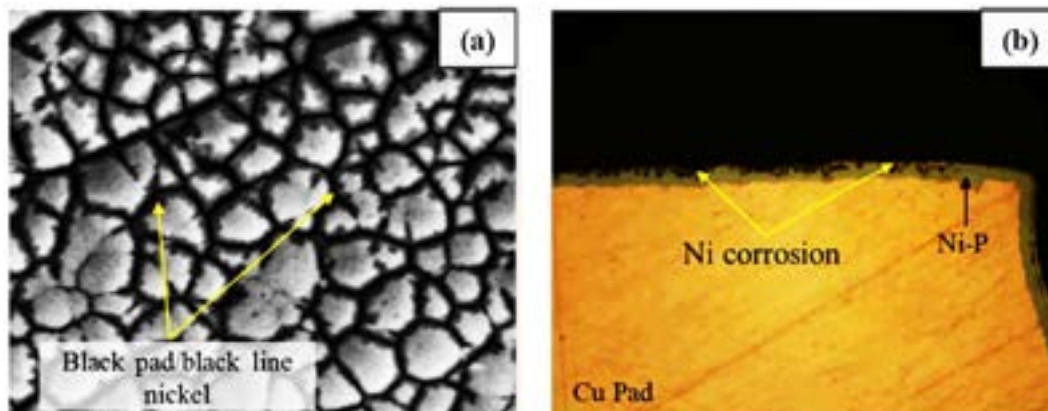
(a) Black pad between the nodules, and (b) Ni corrosion layer of ENIG surface finish [117].
